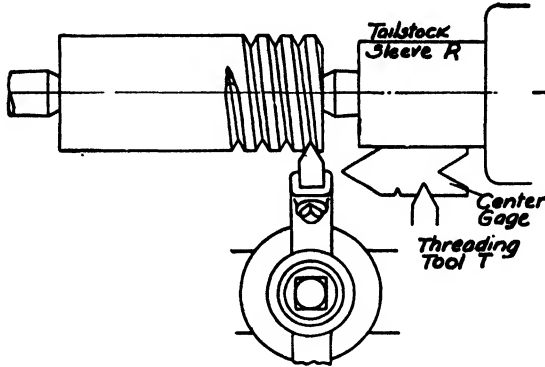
Cutting a Sharp "V" Thread on a Lathe.
